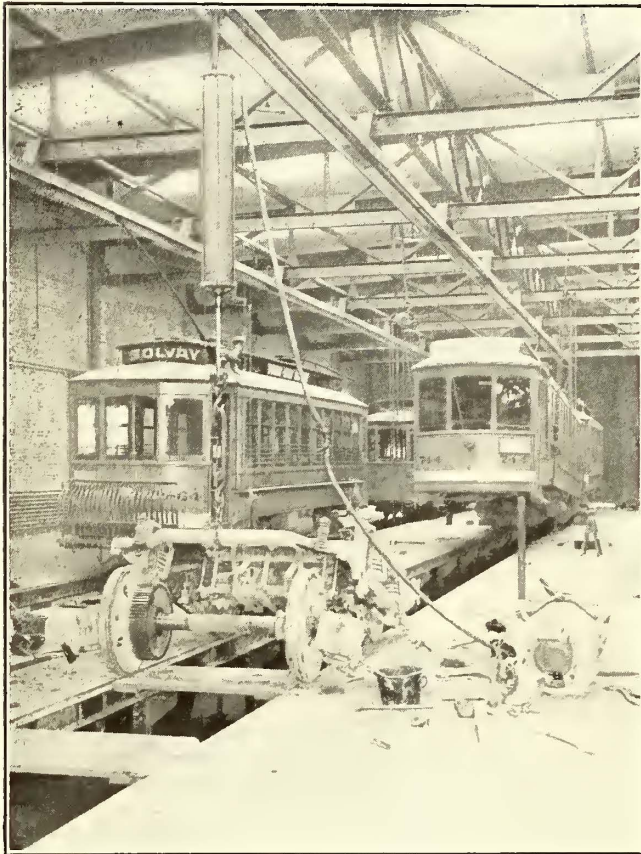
Syracuse Shops—Air Hoist and Car Sling on Light Overhaul Tracks
